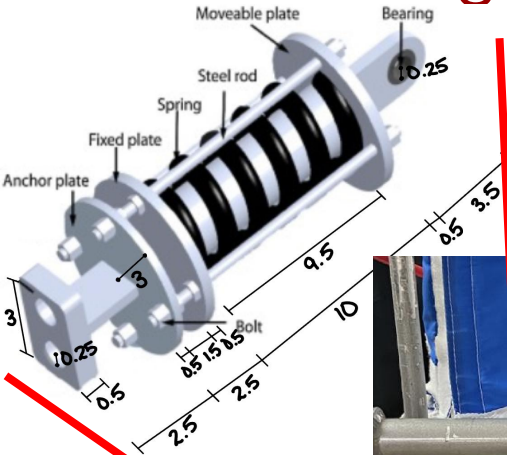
Depiction of the Spring Viscous Damper Component with dimensions in cm [13].
